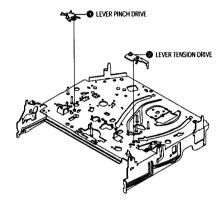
Lever Pinch Drive, Lever Tension Drive Removal
